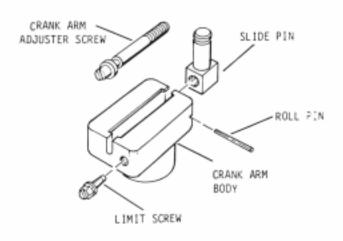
ASSEMBLING THE CRANK ARM ASSEMBLY
